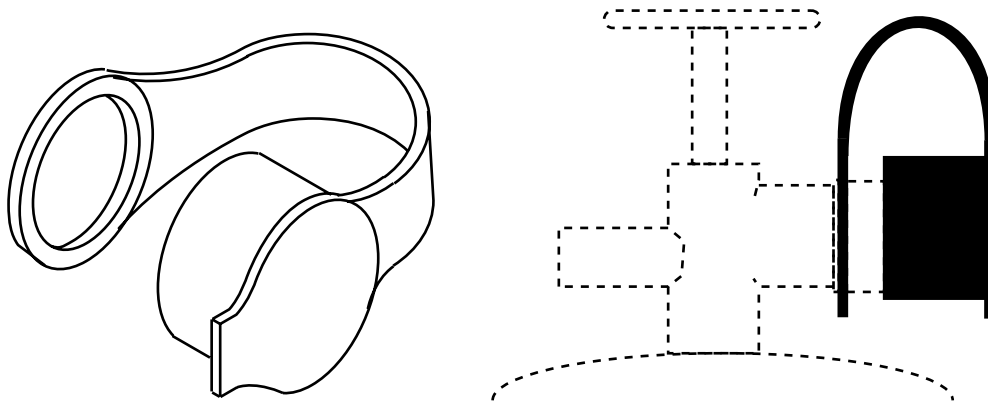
Type 1 CGA No.791 Valve Dustcap
